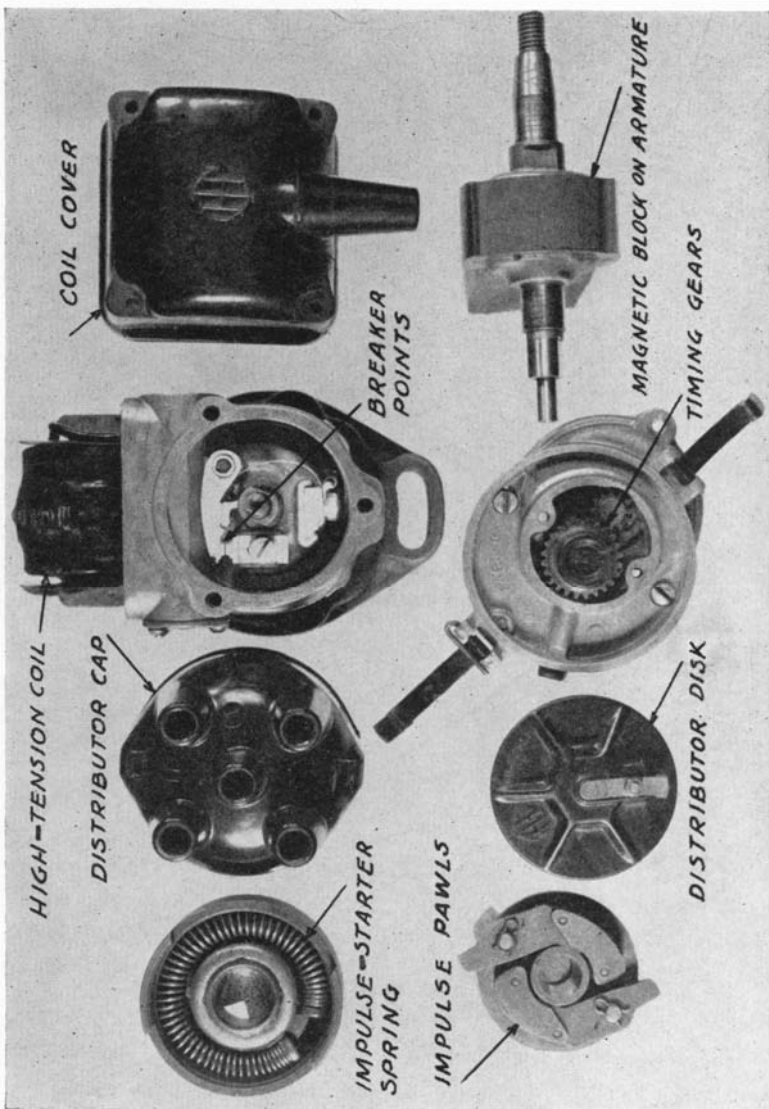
Parts of new inductor high-tension magneto. This smaller simplified magneto is made possible by mounting a small block of new magnetic metal on the armature in place of the usual wire coil. The stationary mounting of the high-tension coil insures longer life to the coil and simplifies repair work.
